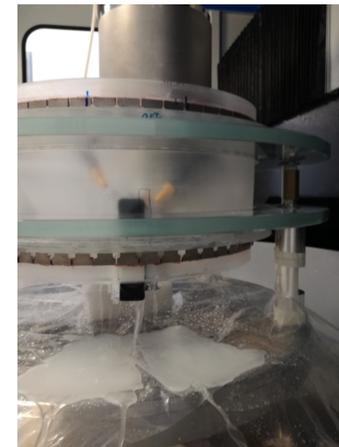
The pitch tool equipped with TRizact 3M™ is fixed on the robotic arm of the Zeeko machine and the vertical carriage movement has been used to move the tool up and down.
